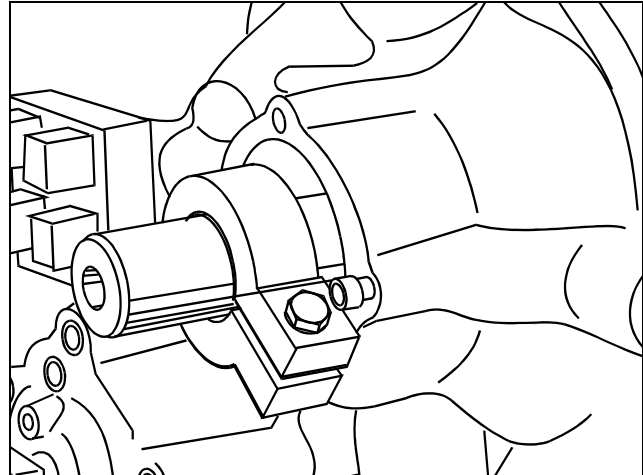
Locking the male rotor using clamping device T4 for dismantling the axial bearings
